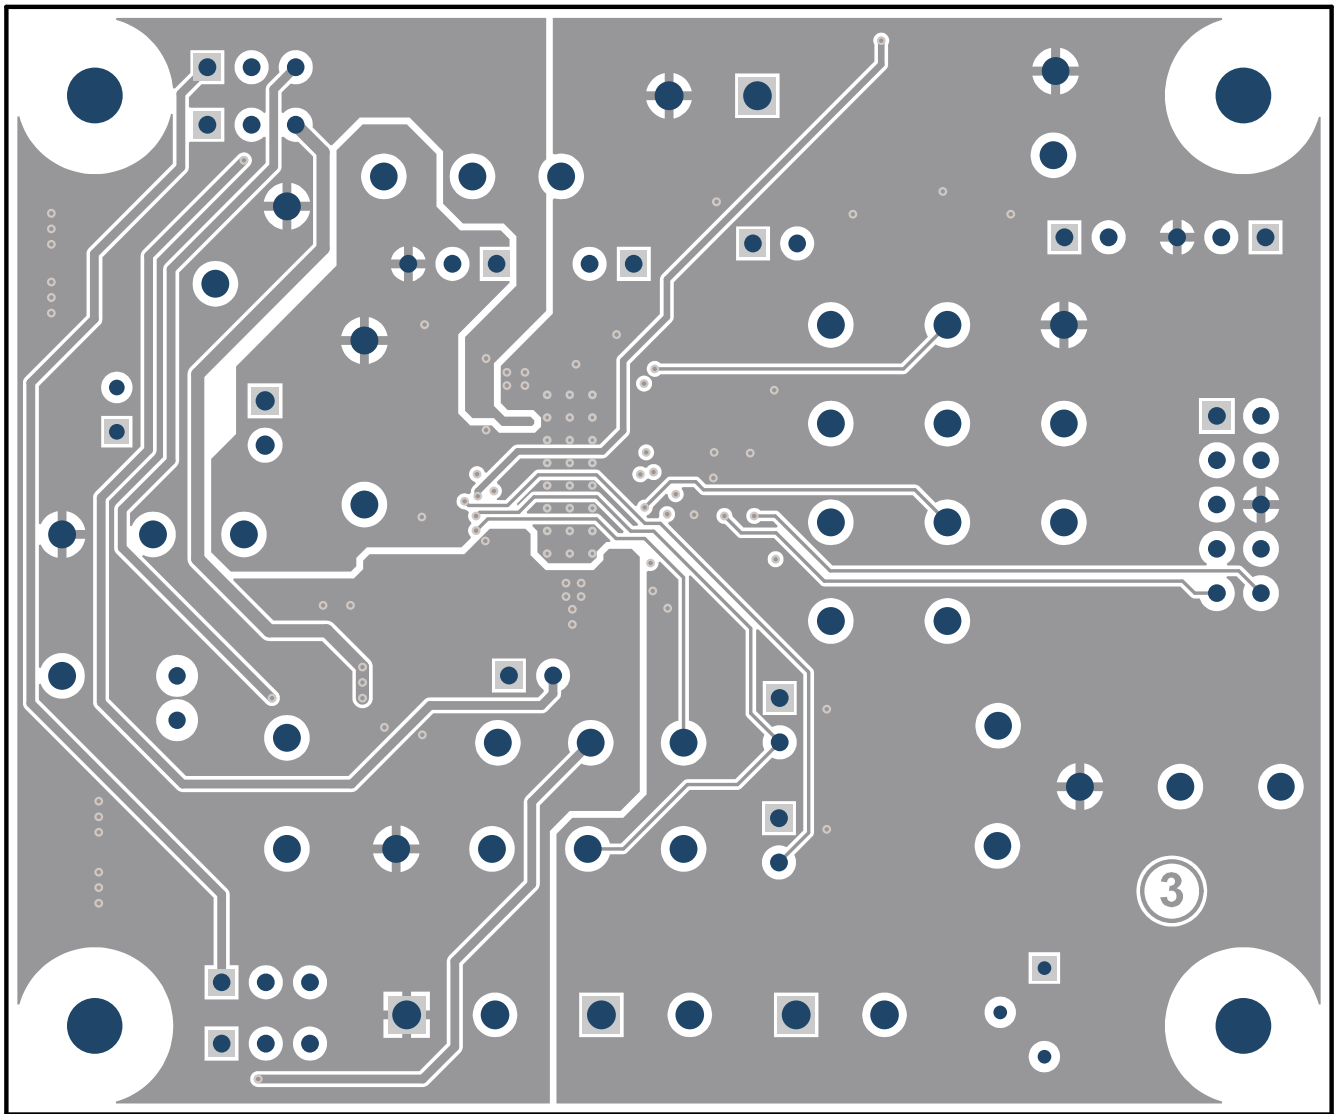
TPS8802EVM Top Layer PCB Layout
